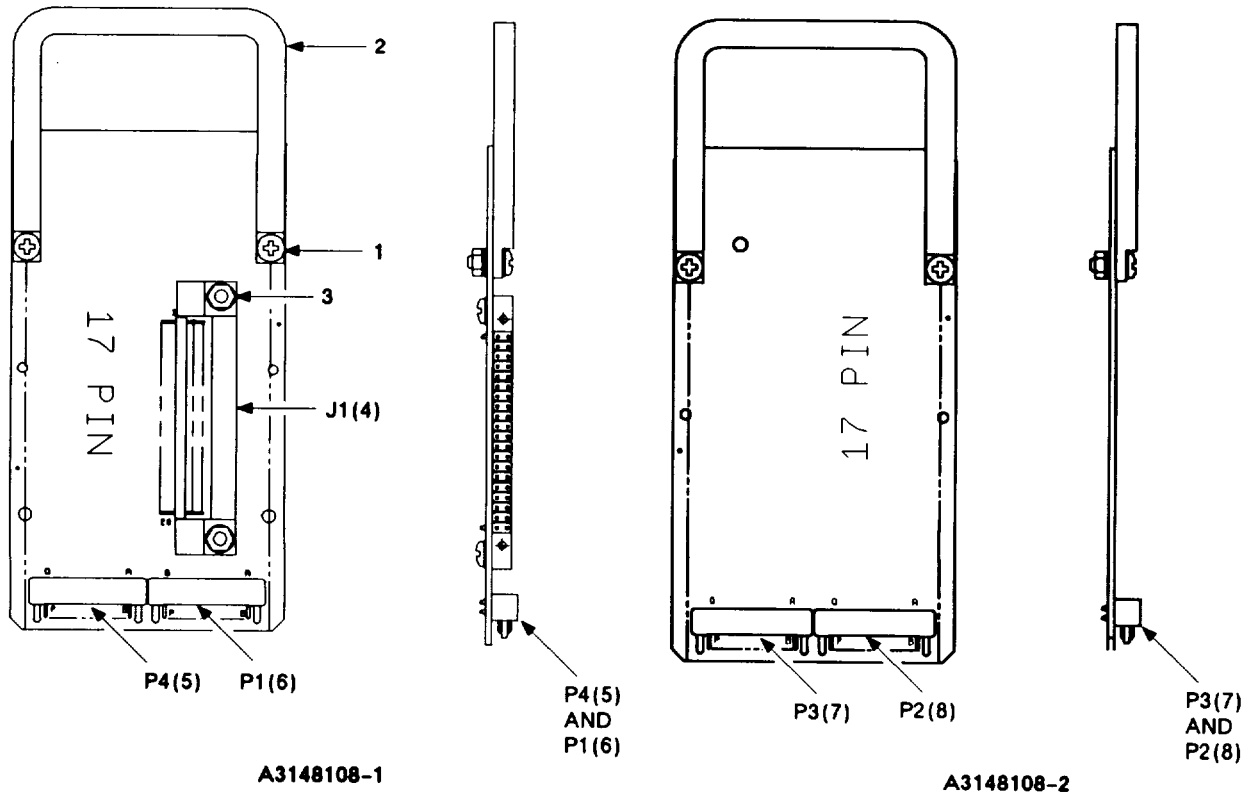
Electronic Test Extender Cards-17 Pin Connector Component Layout
